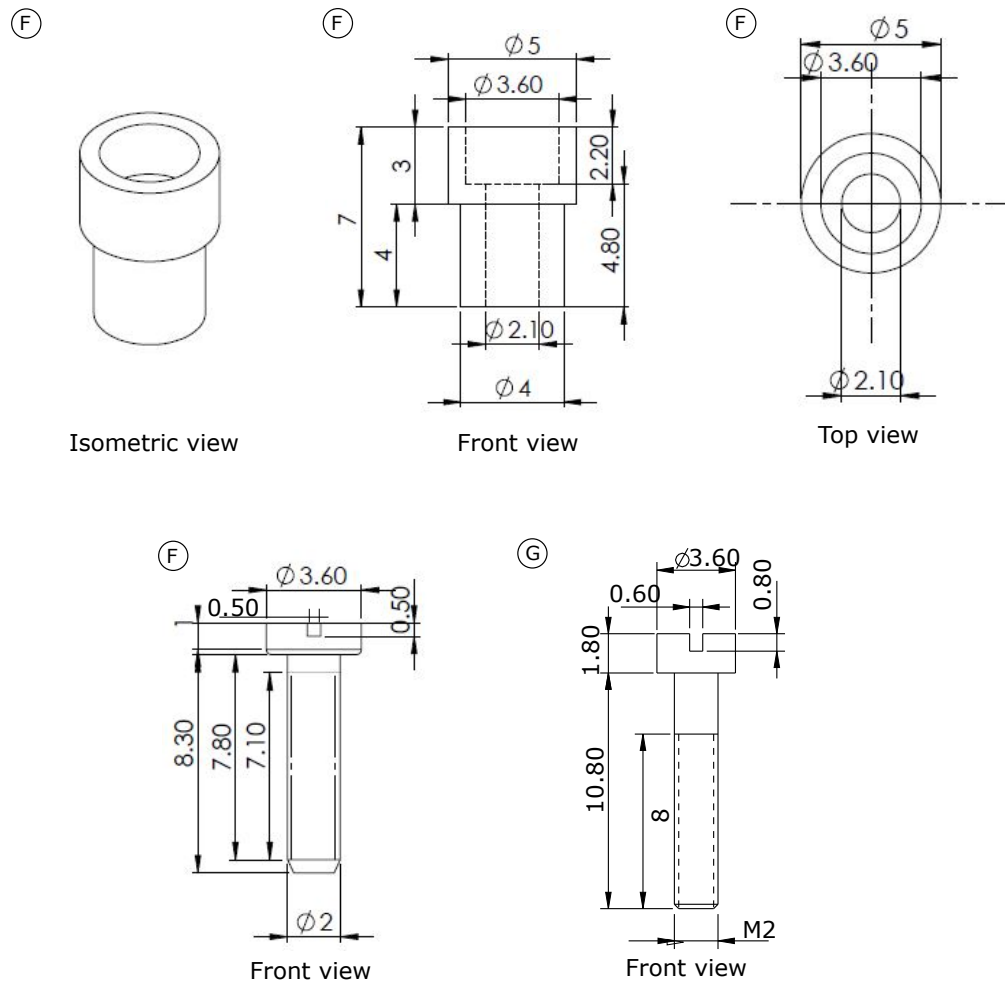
Dimensional details the parts F and G of the ion trap. All the dimensions of length are in units of millimeter and the angular dimensions are in units of degree.
